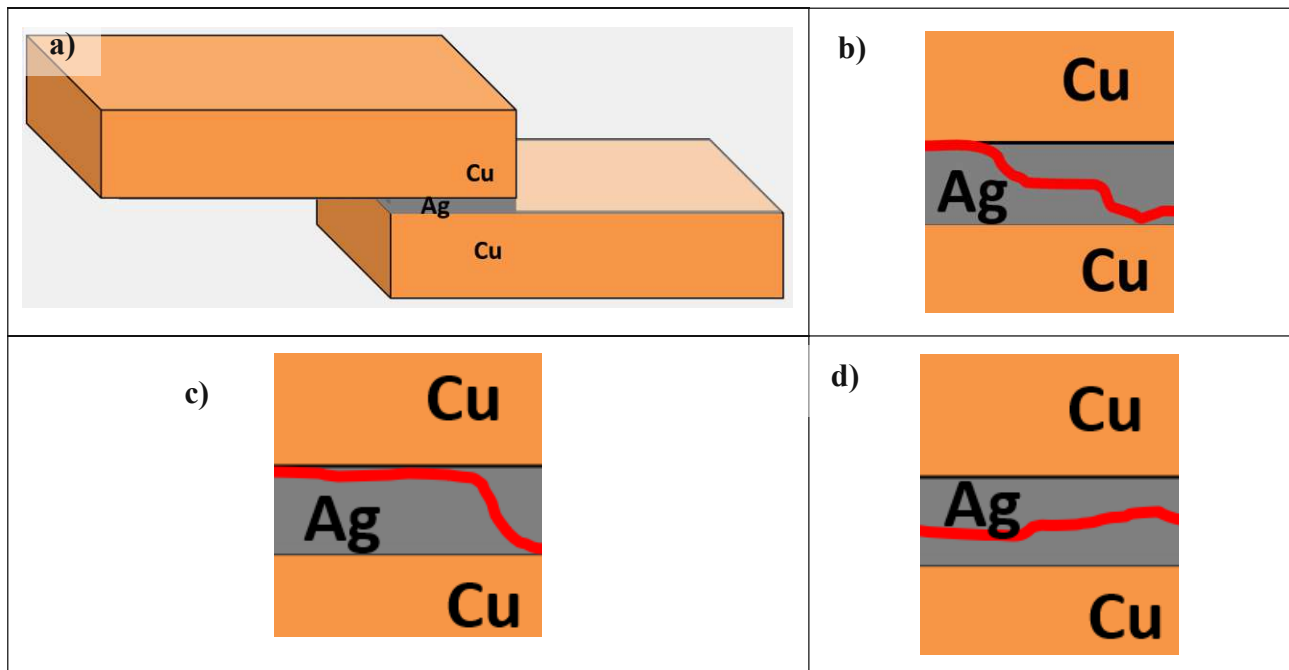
Sketch of the lap-joint (a) and main fracture propagation types FP-1 (b), FP-2 (c), and FP-3 (d) for the sintered silver interface.
